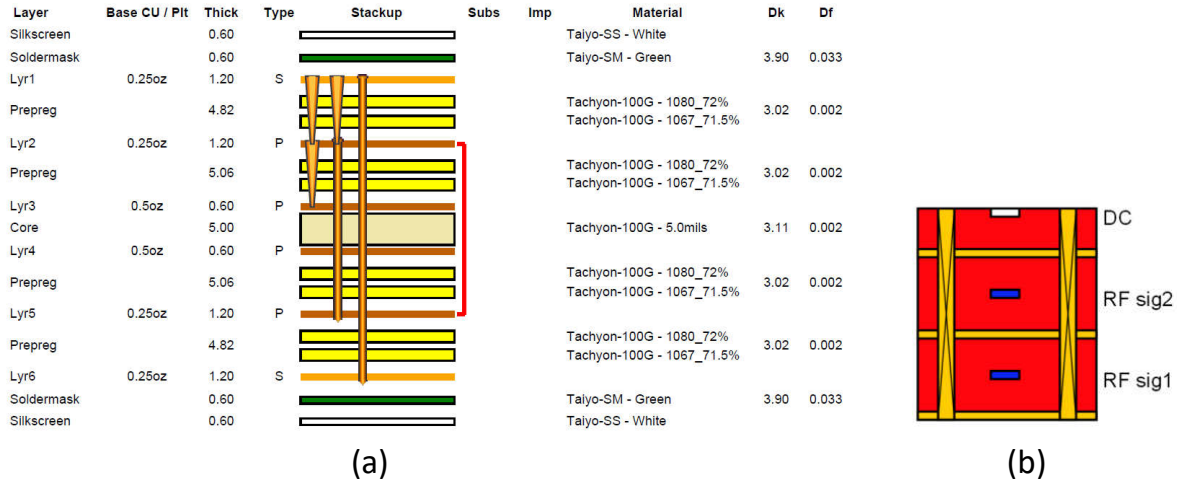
a) Wiring stack of the PCB. b) Cross section in the wiring stack showing the RF and DC routing techniques
